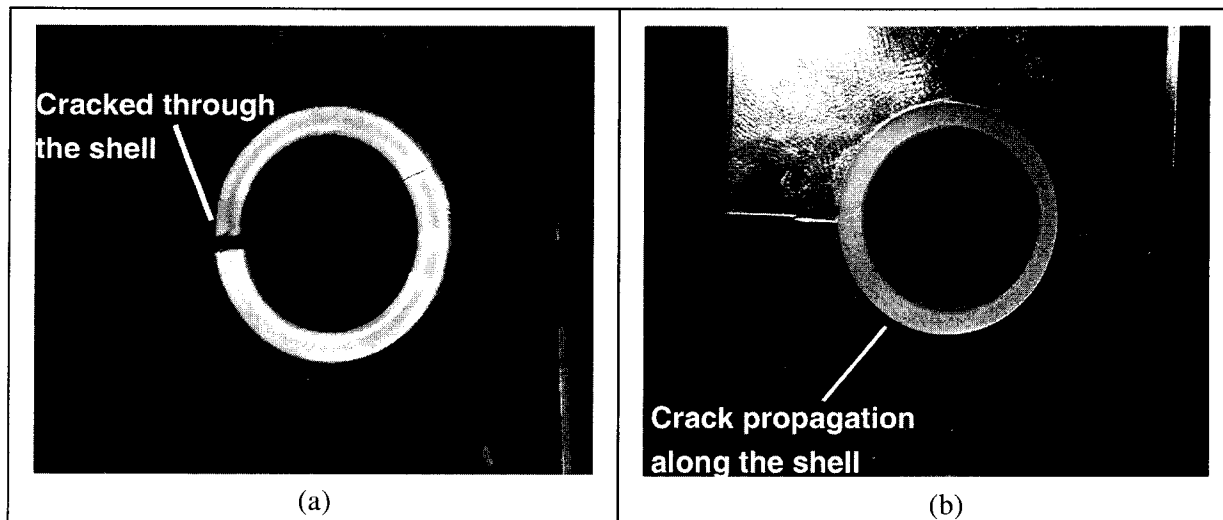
Failed specimen with (a) crack through shell, (b) crack around the shell.
